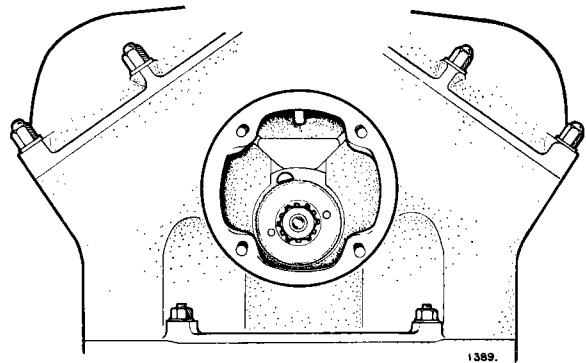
The serrated plate for adjustment of the top timing chain is accessible after removal of the engine breather housing
